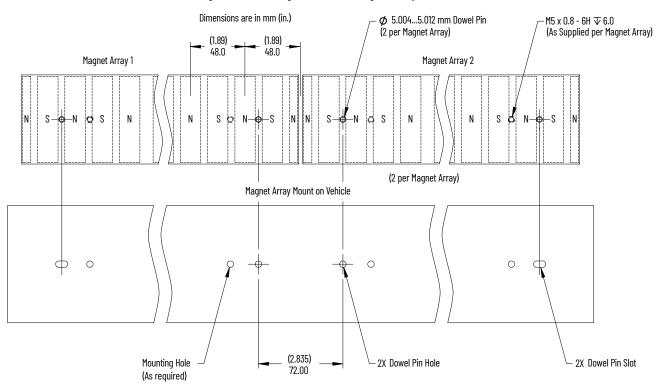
Mounting Two Covered Magnet Arrays End-To-End
